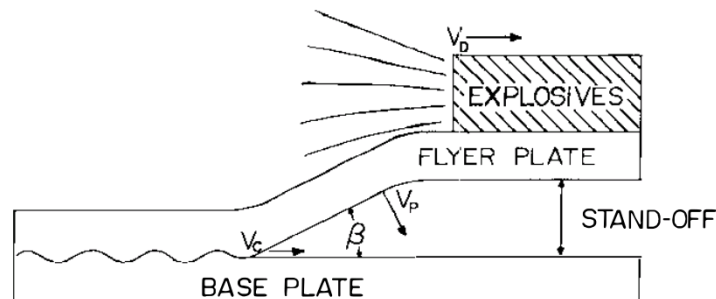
Typical, asymmetric explosion welding configuration [7].
